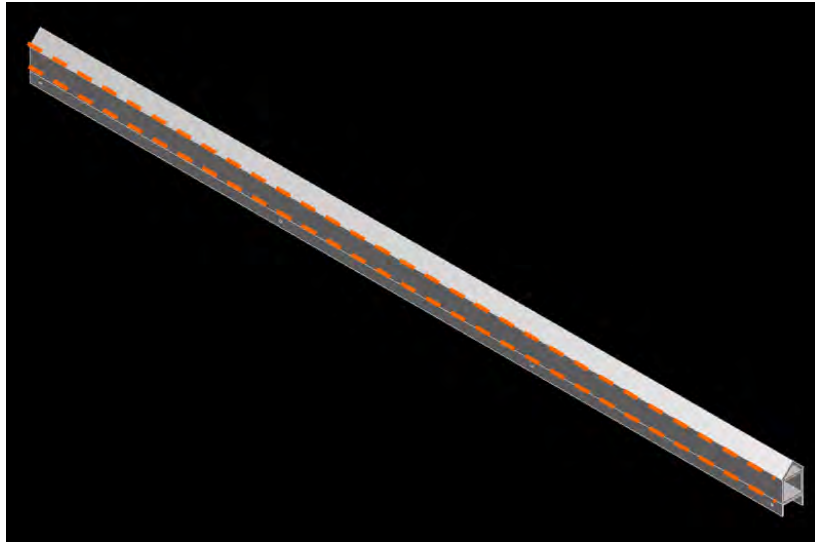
Isometric view of CAD model modular rail system showing weld locations as dashed orange lines. The bottom-right of the image has the exposed cross-section of the assembly.
